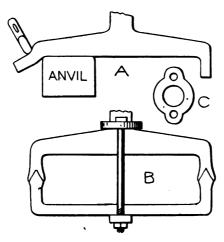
SHAPING AND WELDING THE VALVE YOKE.
